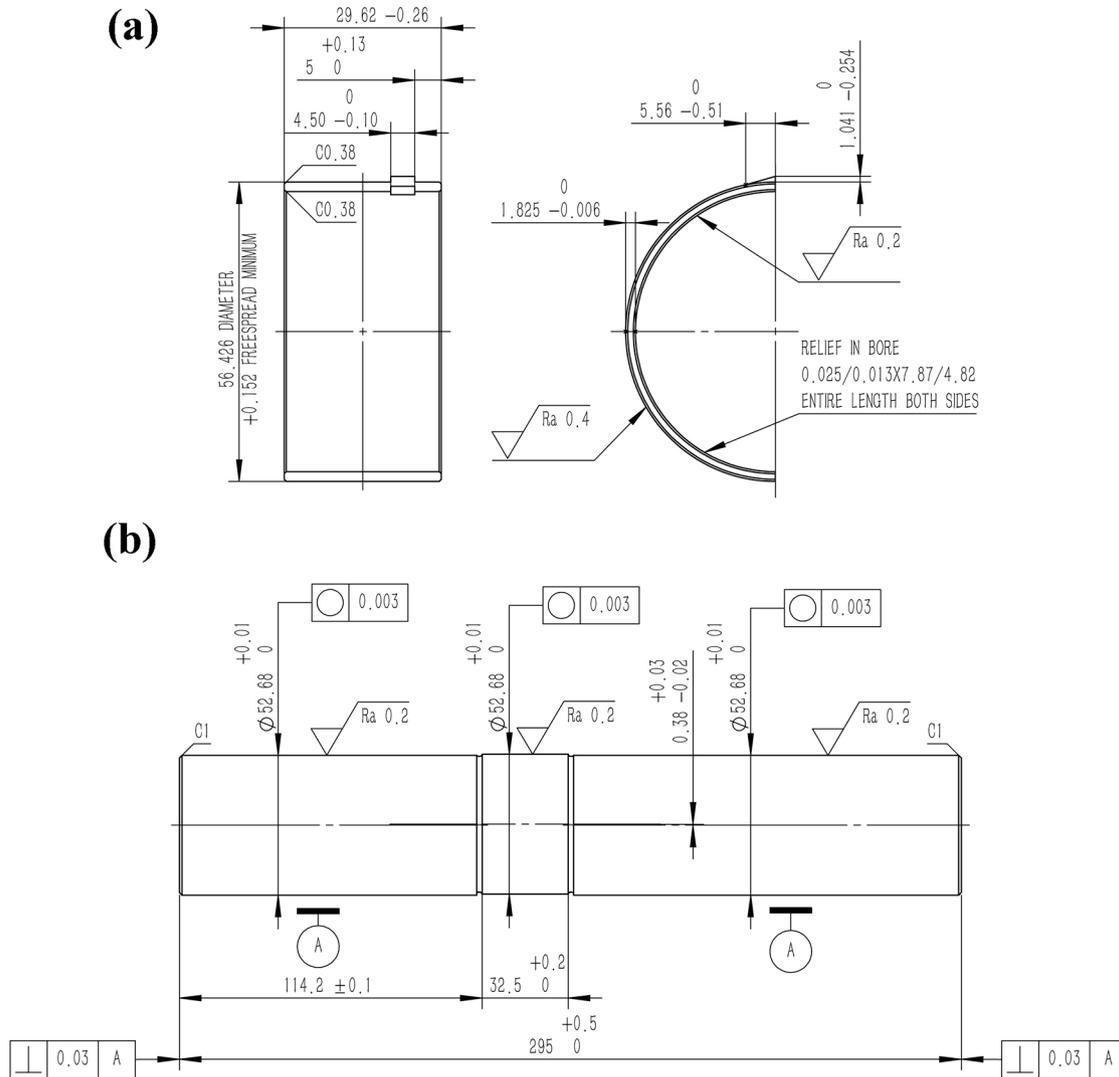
Drawings of (a) test journals and (b) test shafts.
